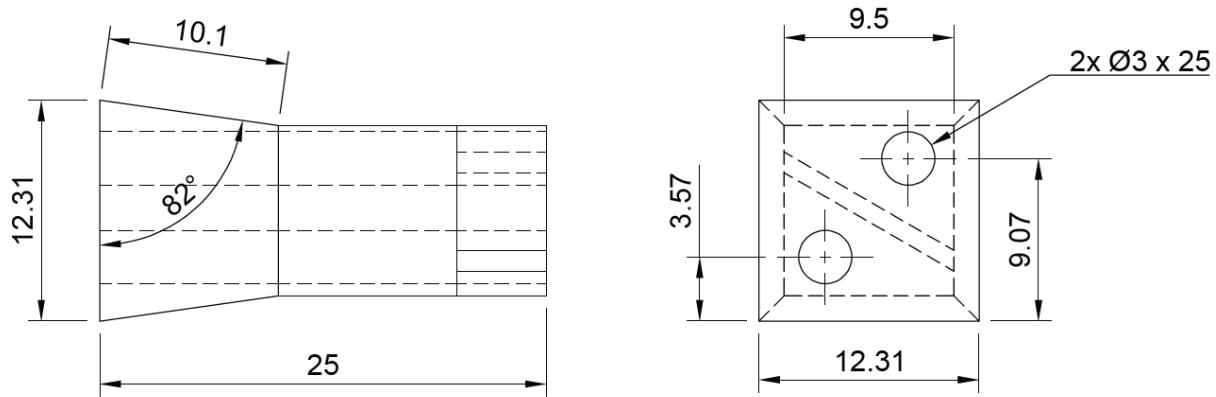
Model of the 3D-printed sample holder with relevant dimensions (all in mm). Left: side view. Right: view from bottom.
